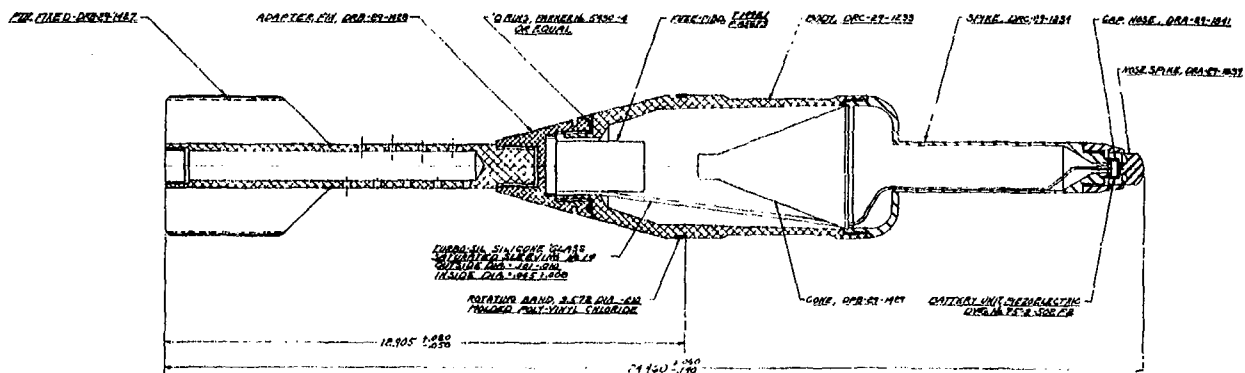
Assembly, 90 mm. T249E8 Mod. 1.
